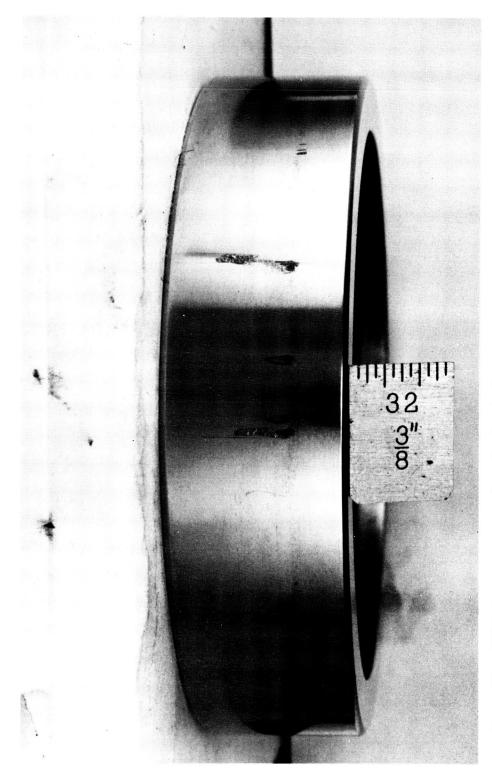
SNAP-8 mercury pump after vibration testing. Motor end bearing outer ring showing galls and scratches.
